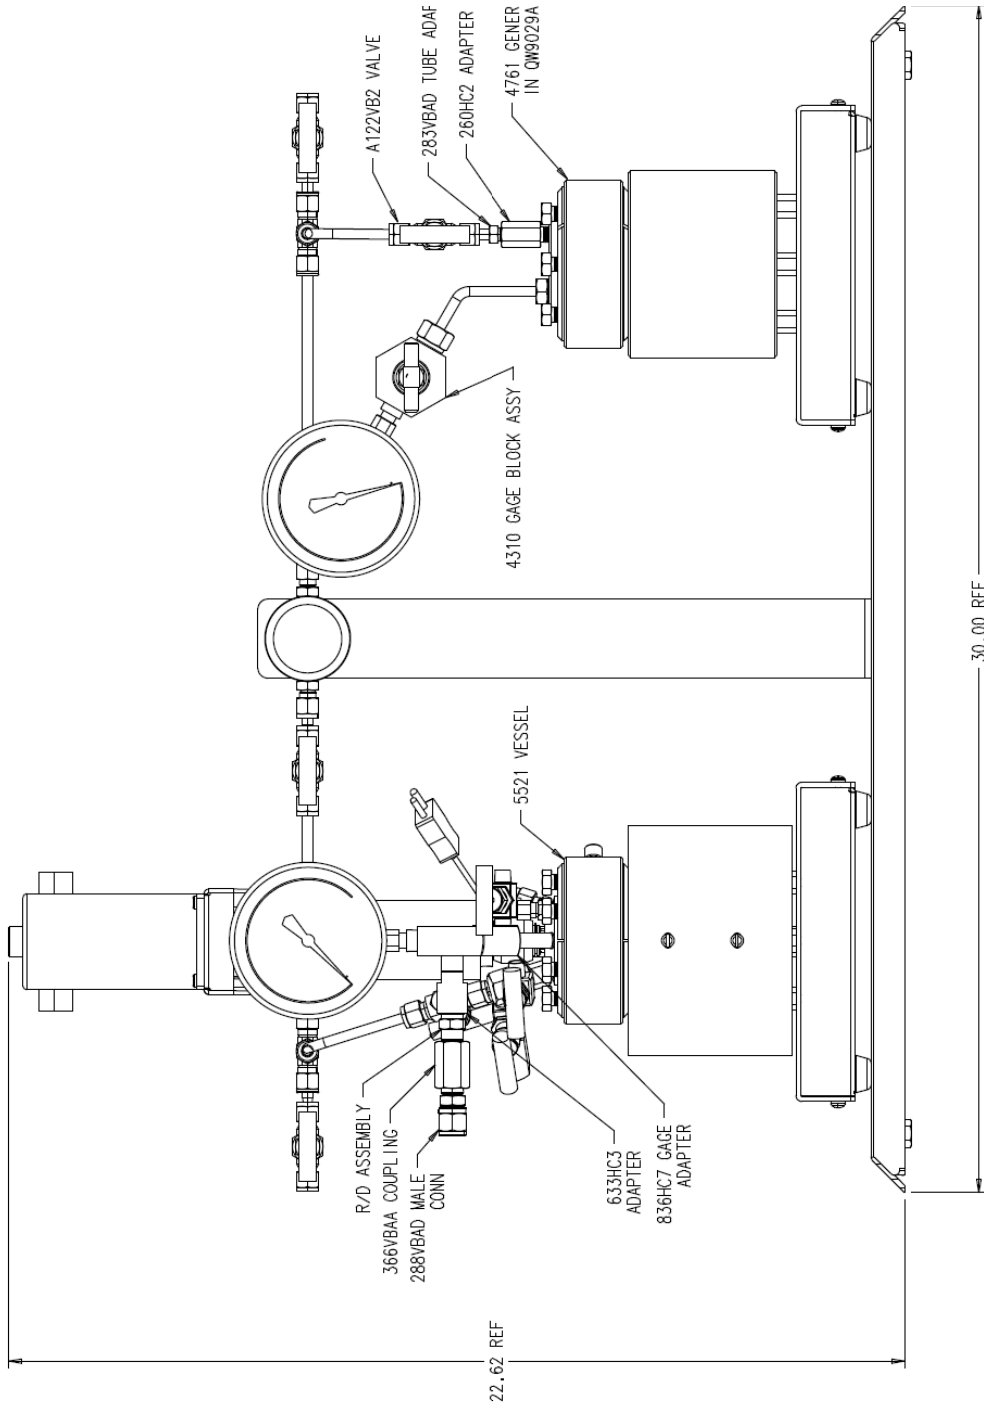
Front view of reactor drawing (All dimensions are in inches)
